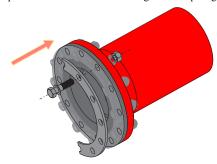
Model RF-DBI-LH Flanged Installation Step 2
